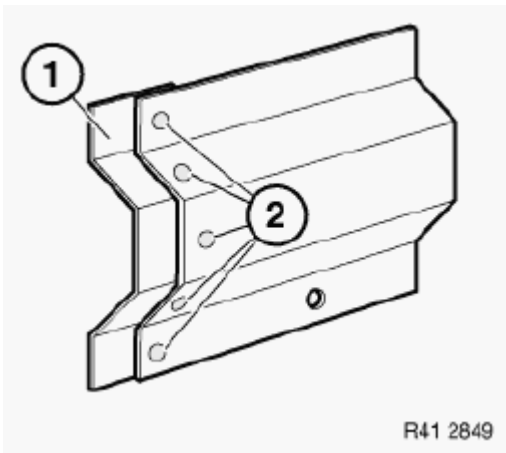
Reinforcement Plate And Welding Primer
